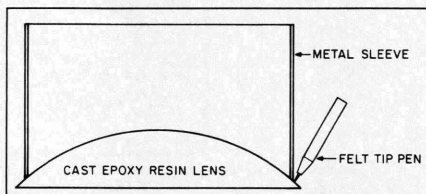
Marking the cast lens for edging. Note that the marking sleeve or cylinder must be perpendicular to this rear surface of the lens.
